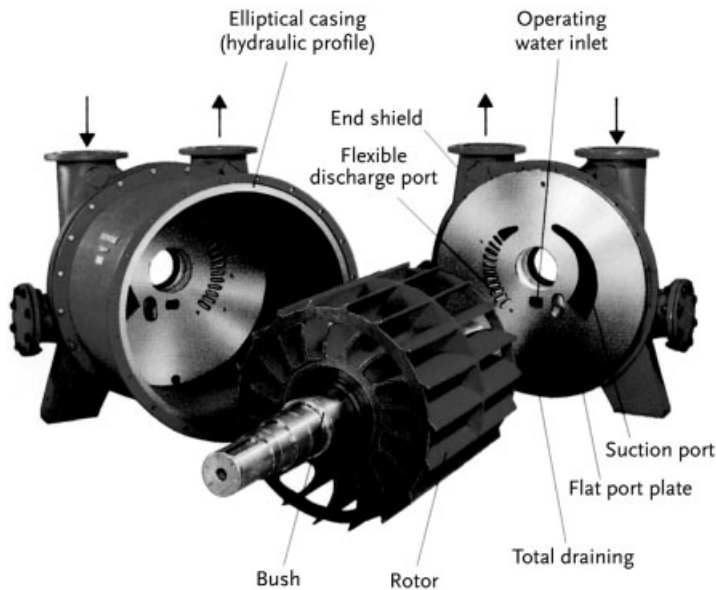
Compression chamber with impeller and port plates of a single-stage double-flow liquid ring vacuum pump (factory photo by Siemens)
